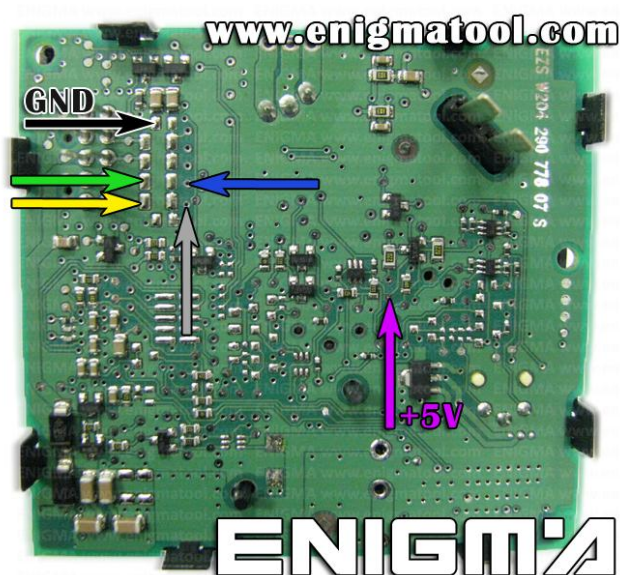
Solder GECKO cables according to colors as shown on picture above.
